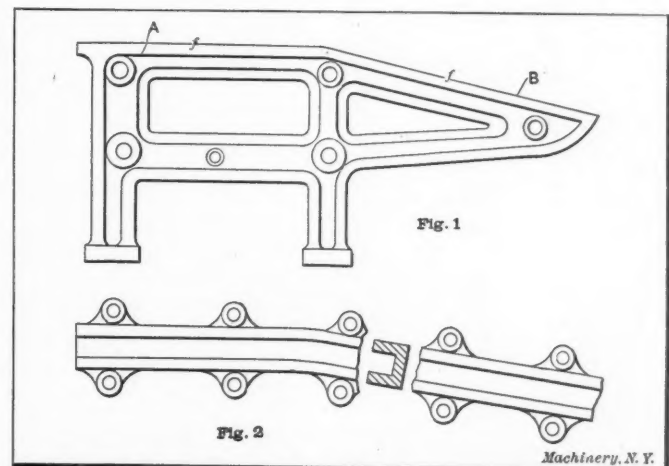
Casting to be planed. Fig. 2. Templet used for Guiding the Tool
